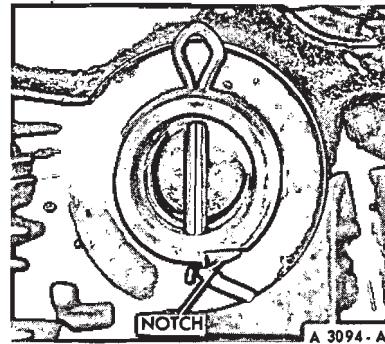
Typical Installation Identification Mark-Rocker Arm Shaft Assembly
